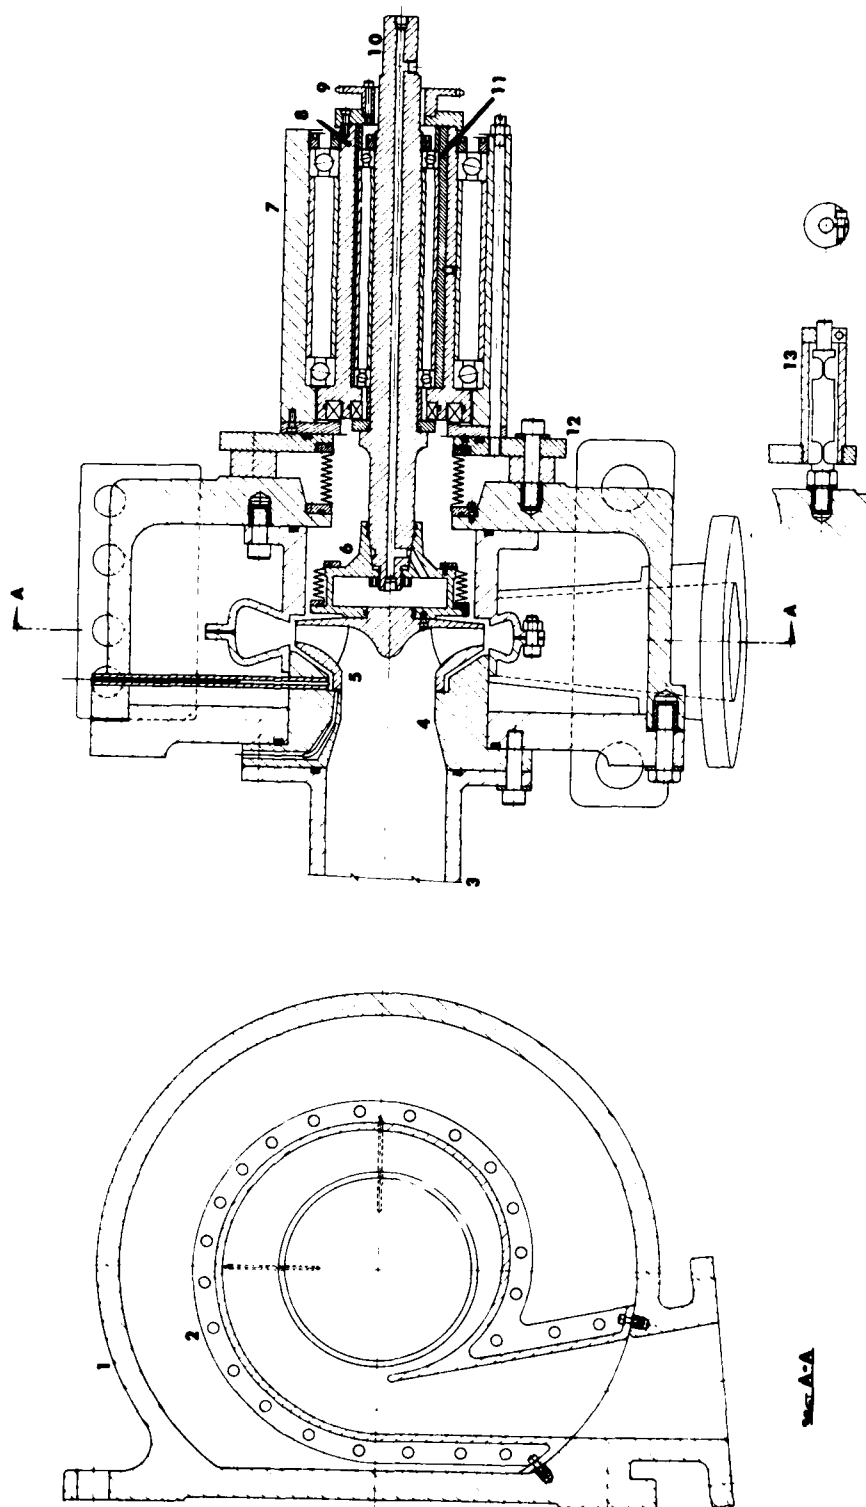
The impeller, volute, internal balance and eccentric drive of the Rotor Force Test Facility
